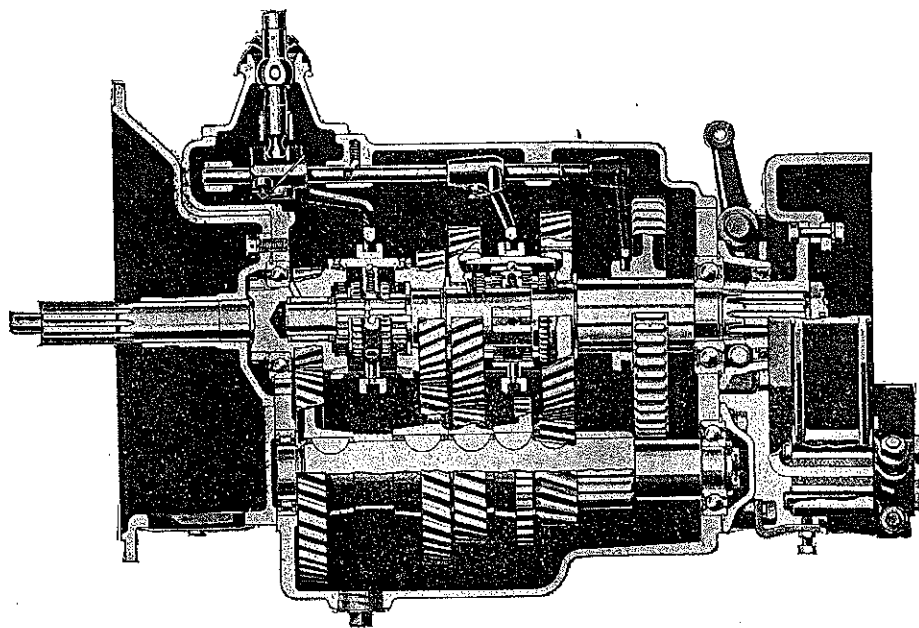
Spicer models 752, 752A, 4452, 5552, 5552A (5-speed direct drive) and 753, 753A, 4453, 4453A, 5553, 5553A (5-speed overdrive)
